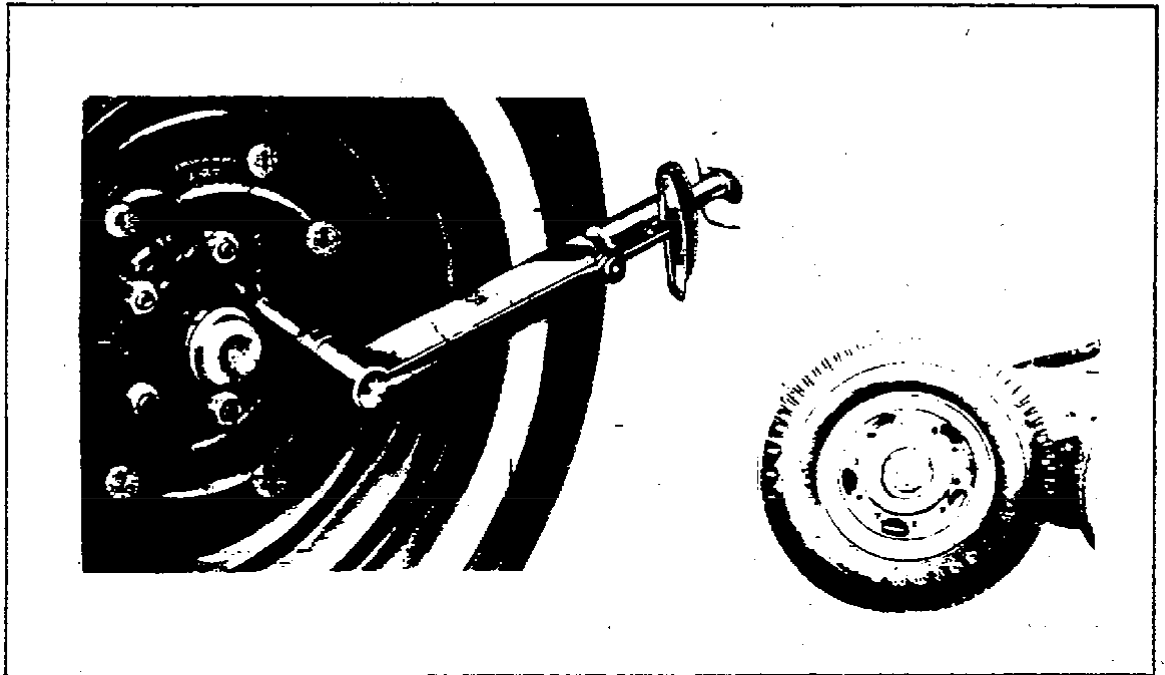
Disc Wheel Nut Tightening Sequence
